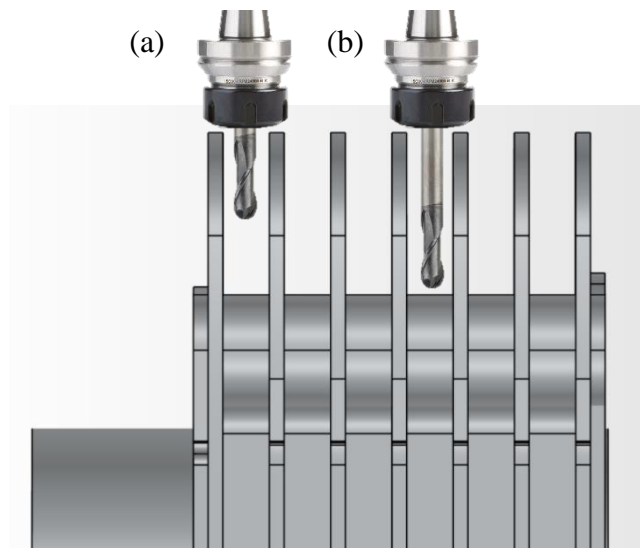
Example of tool reach limitations requiring the use of a longer tool (b)
